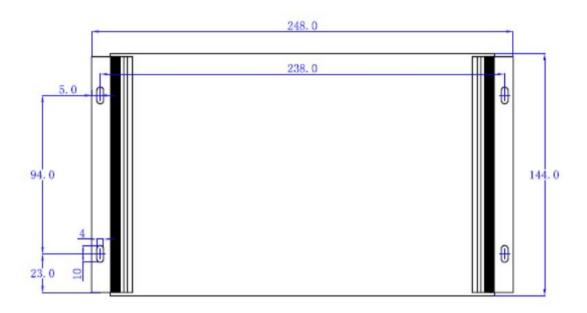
detail geometric structure of DIS-200 (unit mm)
